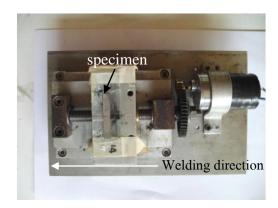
A weld profile specimen set up on the jig.
